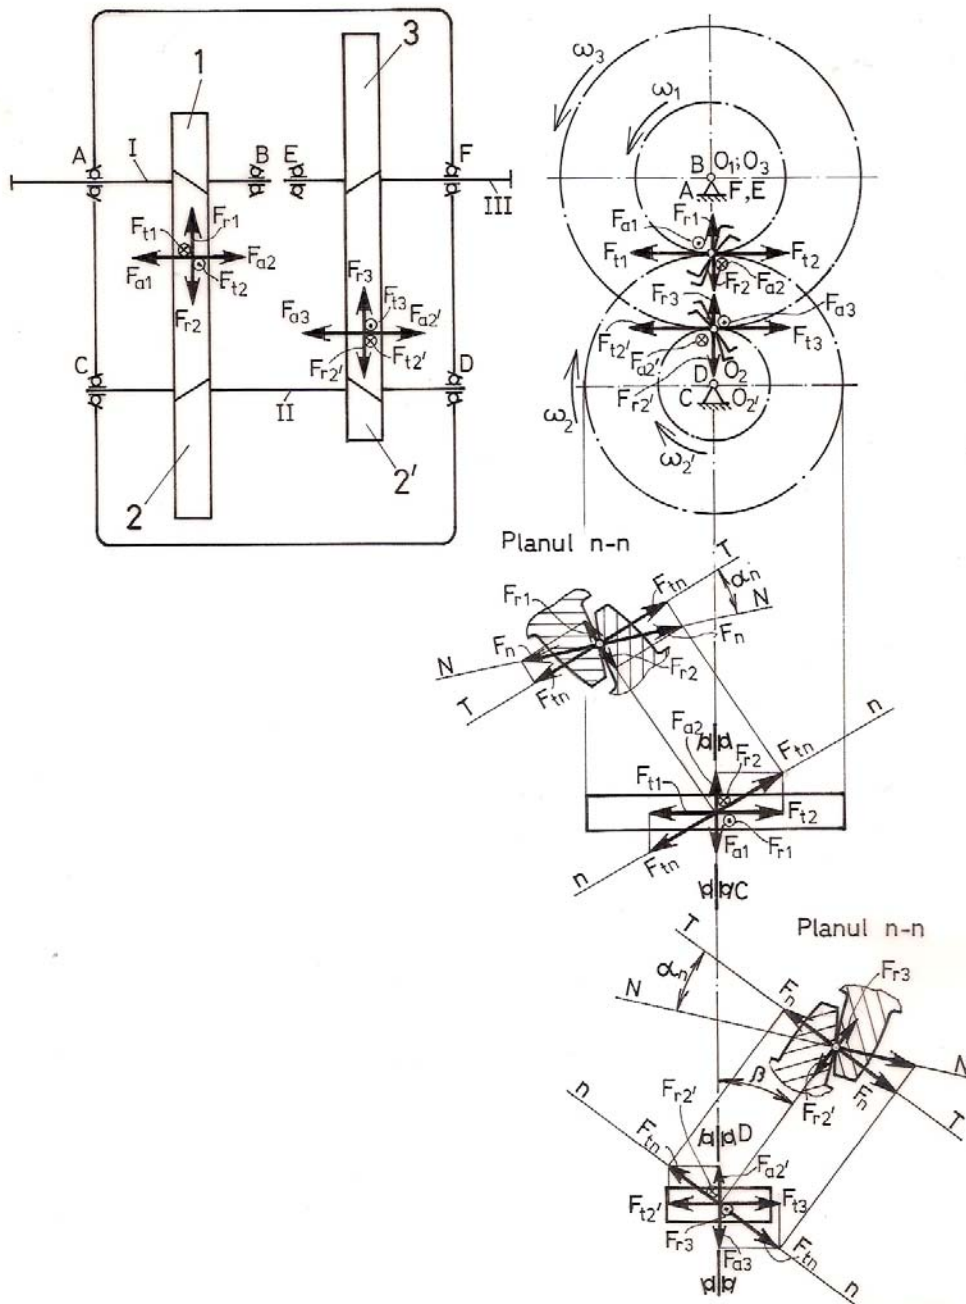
Forces developed in the gears of a cylindrical, coaxial speed reducer with two stages, bad option
